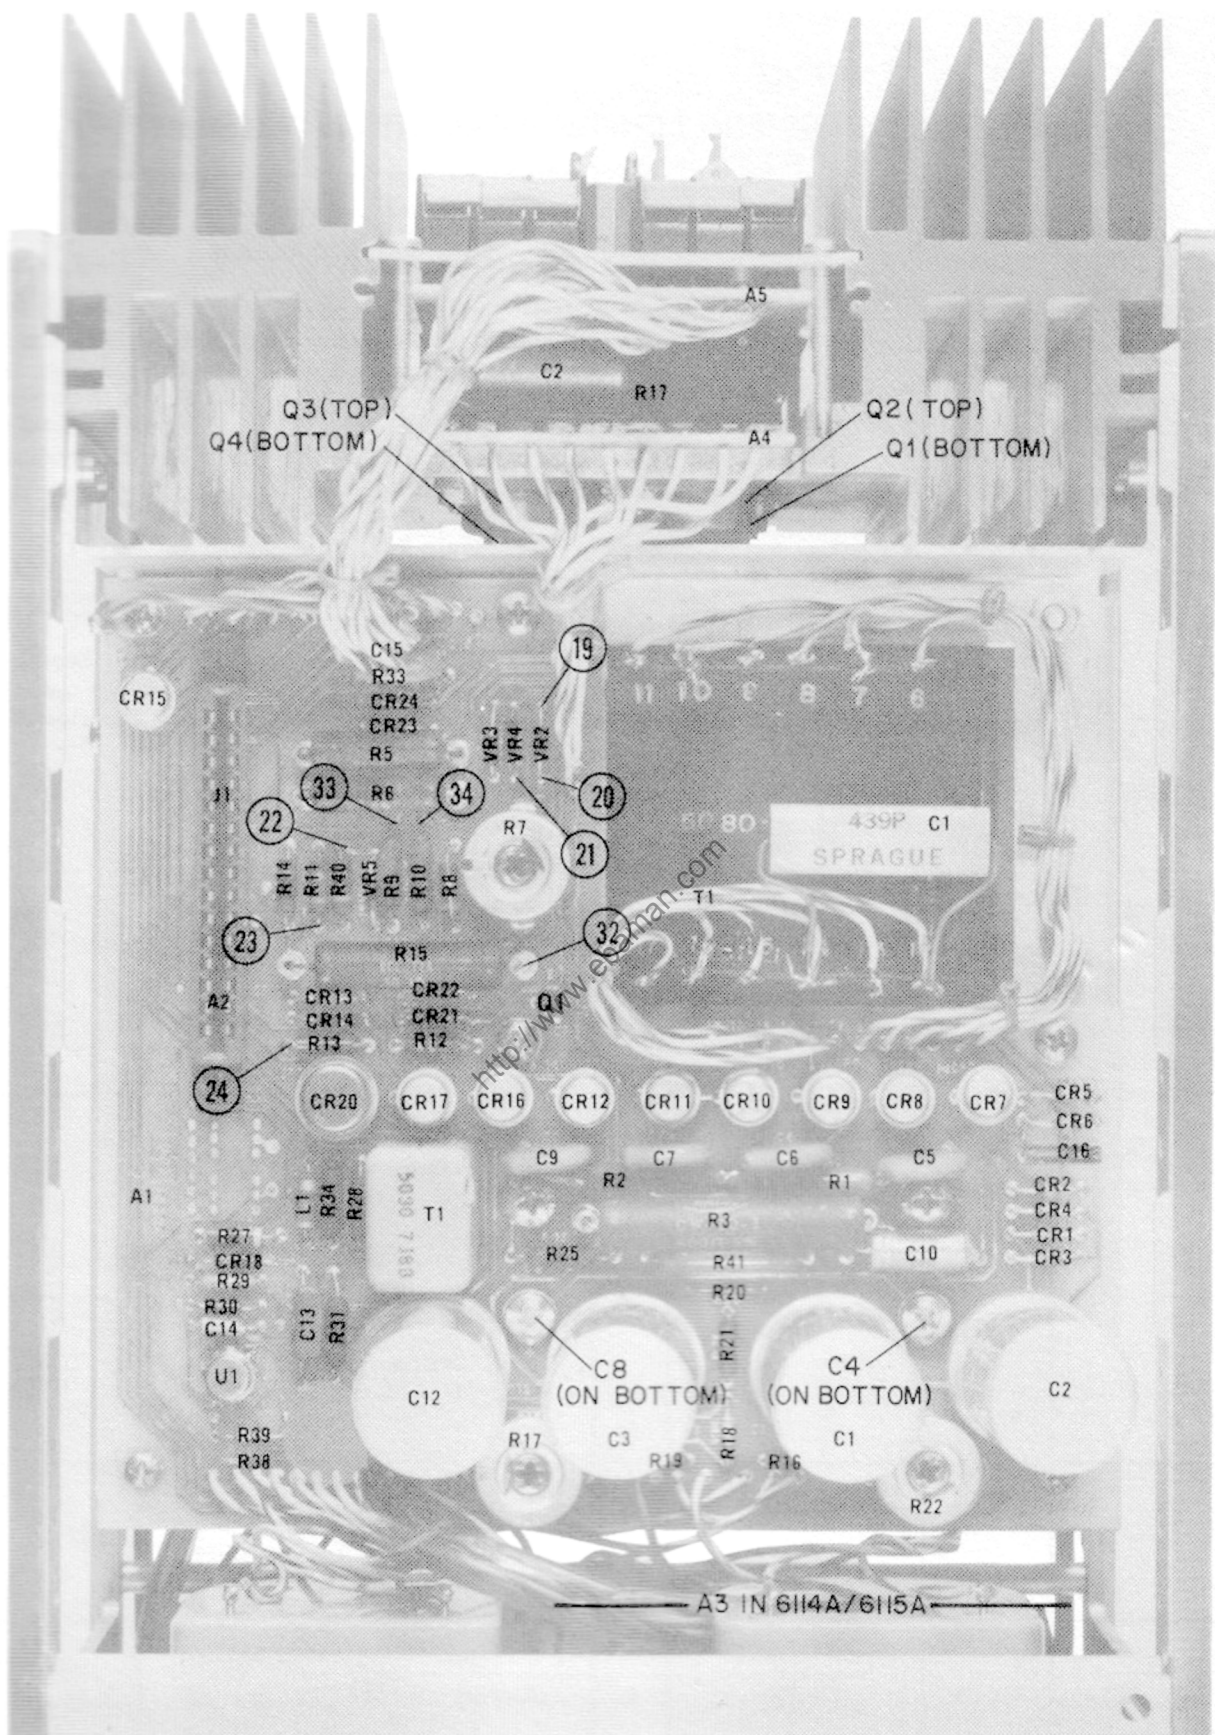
Al Power Supply Board, Heat Sink Components, and Chassis Components, Component Location Diagram
